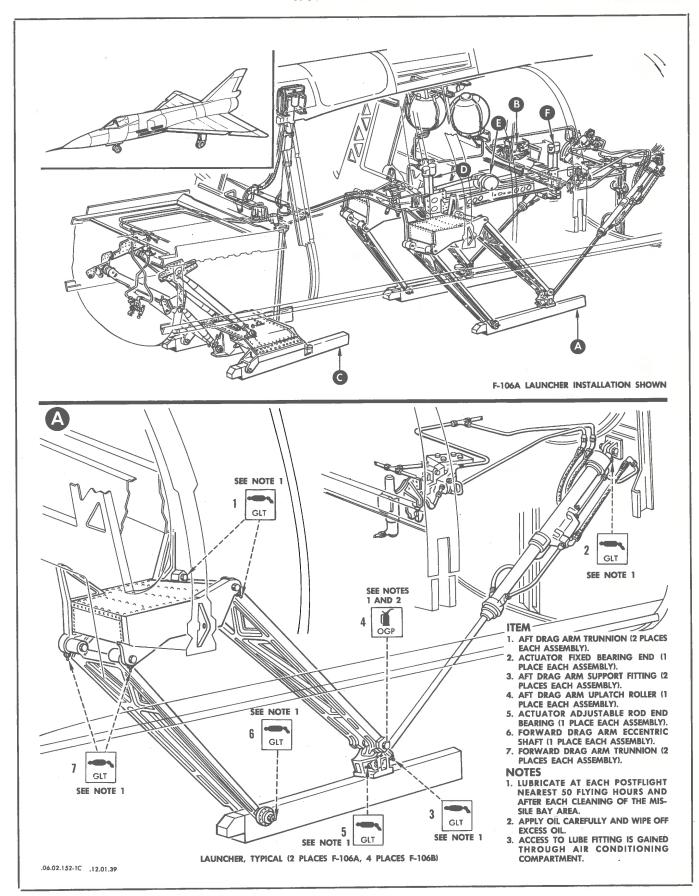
Armament System Lubrication (Sheet 1 of 3)
